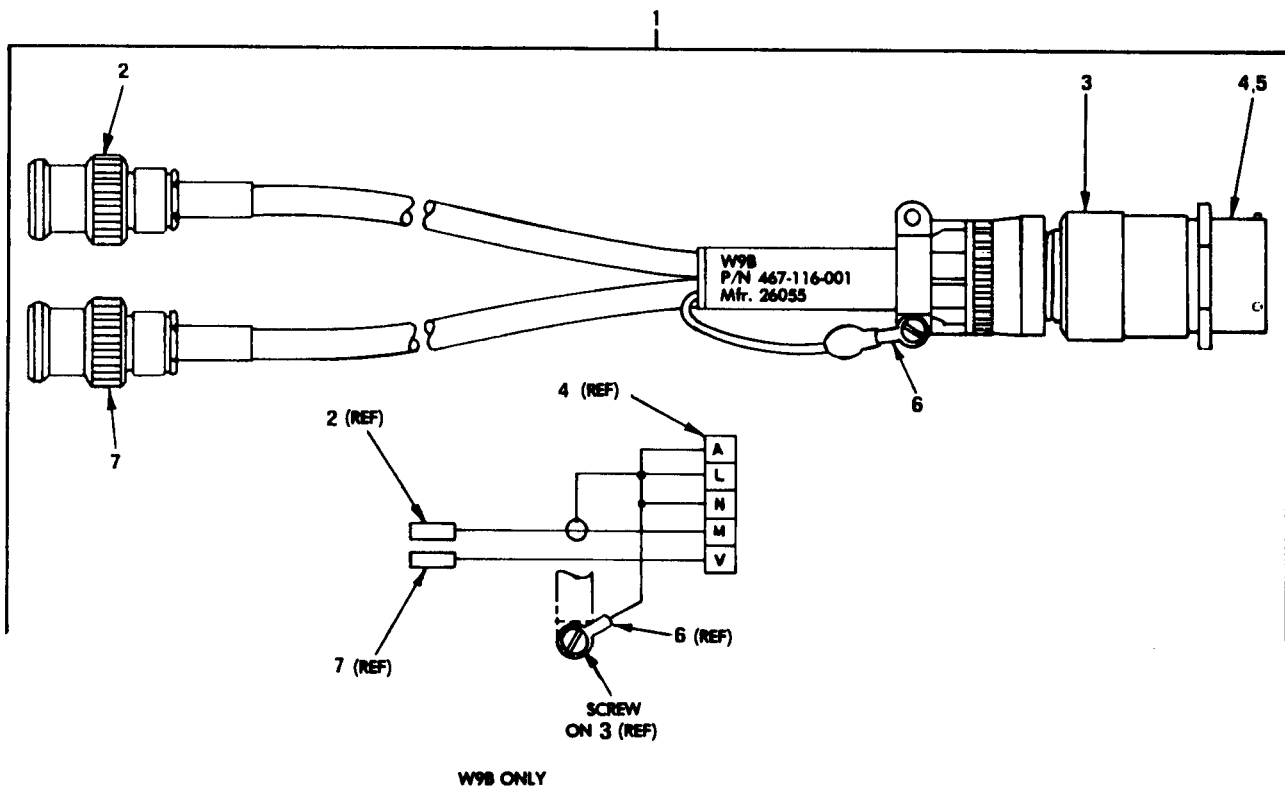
Adapter cable assembly W9B, part number 467-116-001
